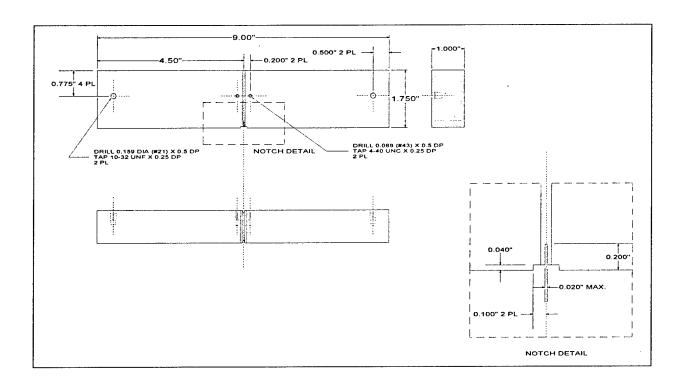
Short-crack SE(B) specimen (dimensions in inches)
